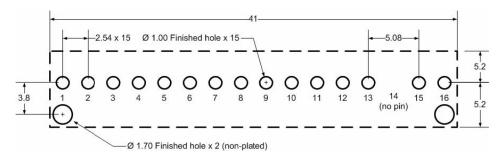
Recommended Footprint - Top View (all dimensions in mm)
